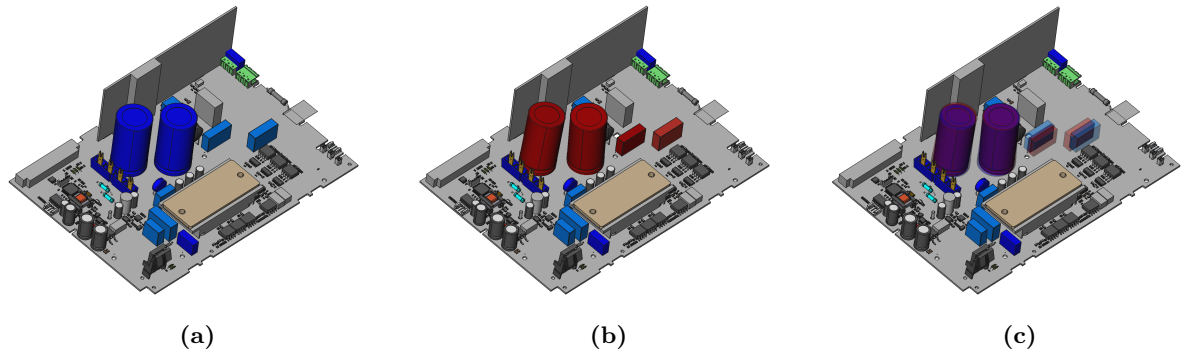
Manufacturing tolerances in production or assembly of parts. (a) Nominal object CAD model (b) Actual manufactured model, with parts in Red having some placement errors (c) Superimposed image of the perfect and manufactured object, that illustrates the manufacturing tolerances.
